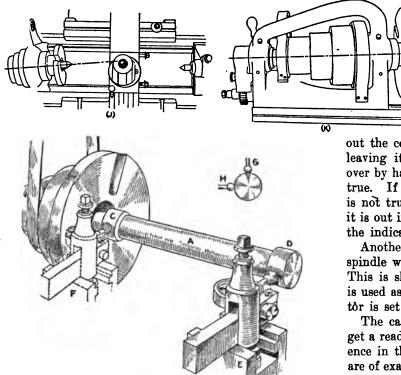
TESTING ALIGNMENT OF SPINDLE WITH SHEARS Exaggerated cases of error shown in outline
